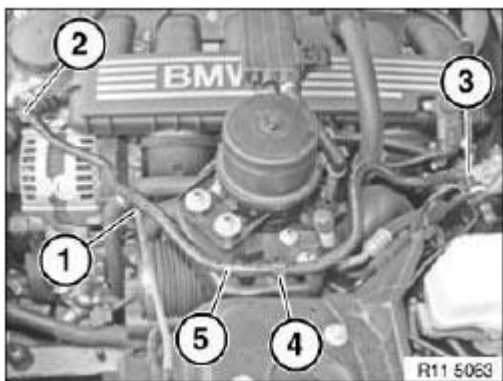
Identifying Vacuum Line, Line Holder, Vacuum Hose And Vacuum Line
